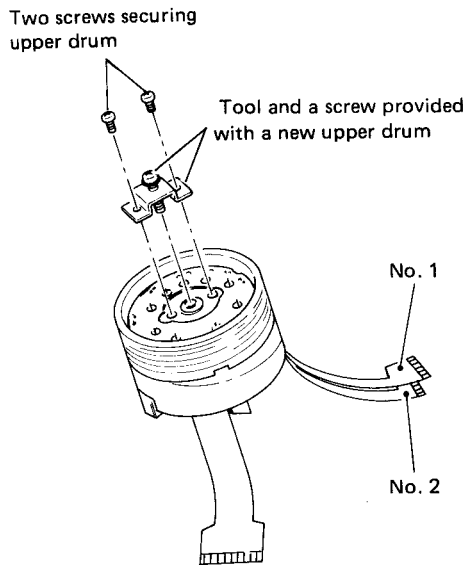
(A) Upper drum ass'y and replacing tool
